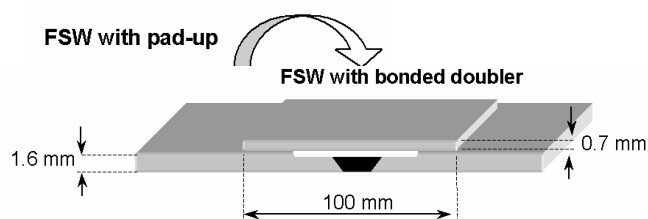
As alternative to the FSW-butt joint with pad up a FSW joint with doubler bonded on top of the weld. The crack propagation rate shows the high damage tolerance performances of such design principle
